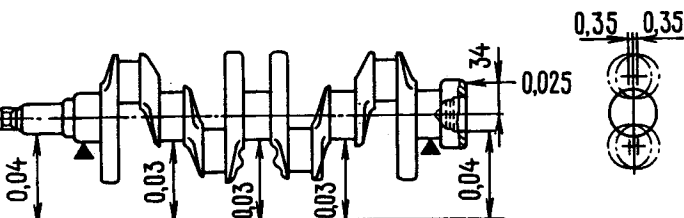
Permissible Runout of Crankshaft Basic Surfaces
